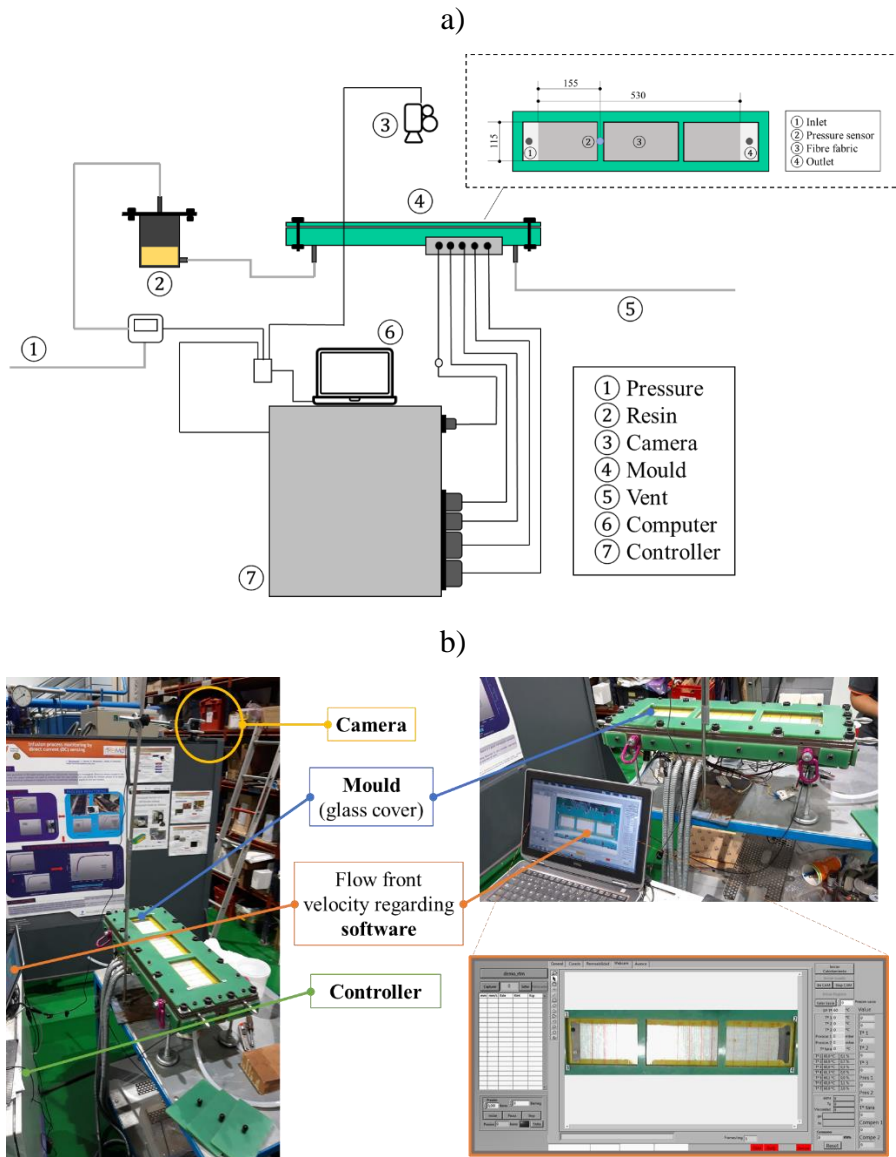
a) Schematic diagram of the test equipment and RTM mould. b) RTM test equipment and software picture.
